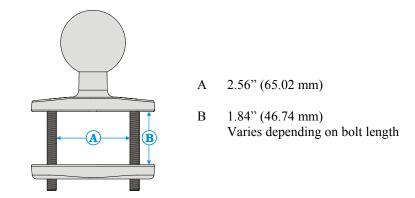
RAM Clamp Mount - Mounting Dimensions (Not To Scale)
